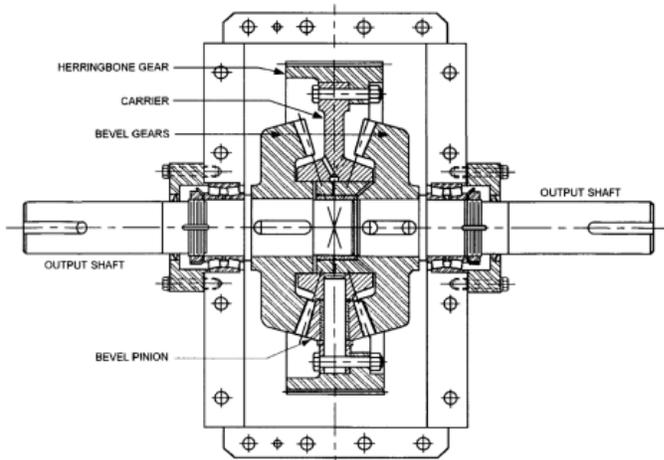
Cross-sectional view of bevel gear type differential
